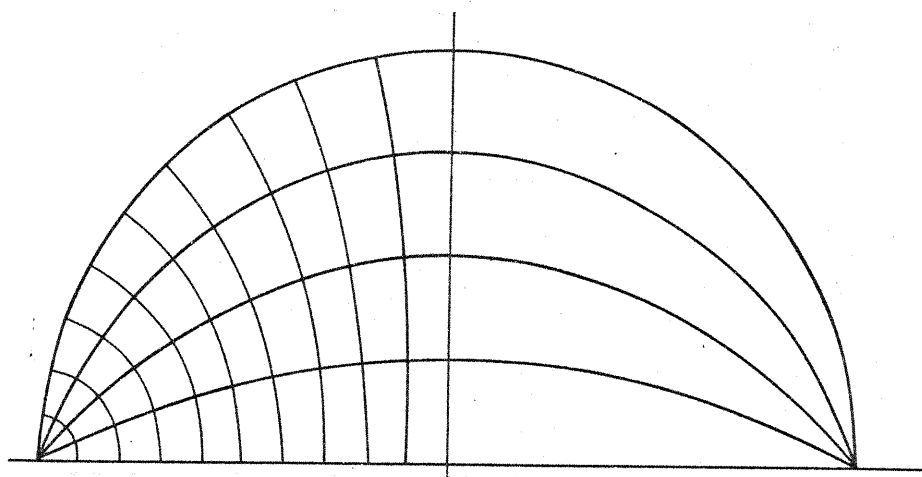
(a) IDEAL WORKPIECE PROFILES REQUIRED DURING MACHINING
